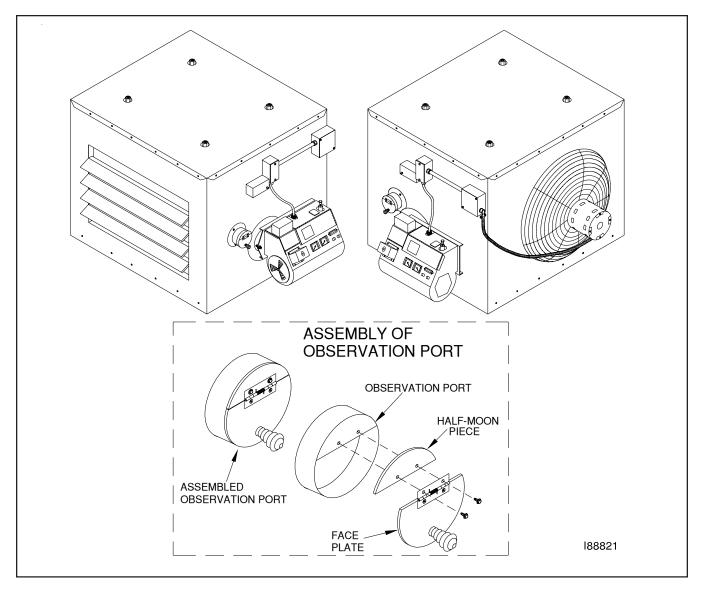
B - Three-dimensional View - Furnace Completely Assembled
